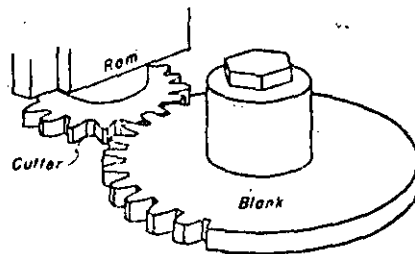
Fellows gear shaper method of forming gear teeth.
